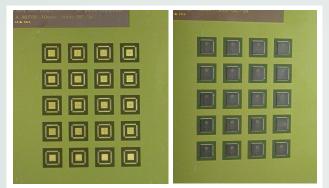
Photo of the QFN test boards before (left) and after (right) QFN assembly.
